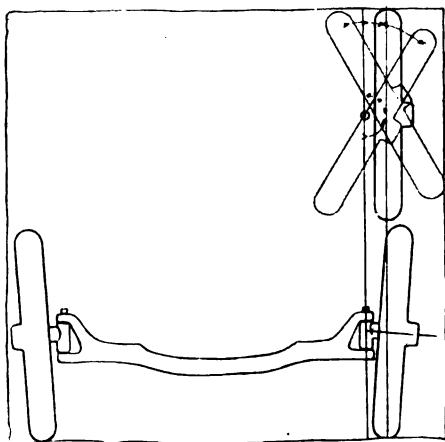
Front wheels usually are closer together at the bottom than at the top to make steering easier and reduce the strain on the steering gear
